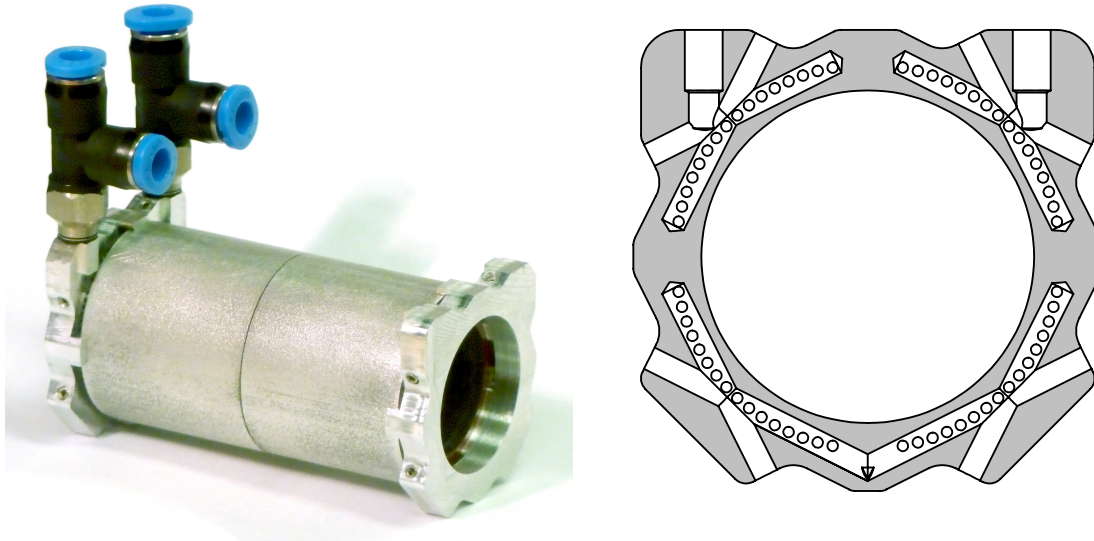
Cooling manifolds are shown installed on the ends of the outer magnet array (left), along with a cross-sectional view of the manifold (right). At one end of the motor, water is brought in and out via 4 mm push-to-connect tee fittings, which also serve as sites for thermocouple probes. The cross-drilled fluid passages are sealed with M2 set screws, several of which are visible on the front of the motor. Two passages suffice to connect all 16 tubes in a bank, and the holes are extended to connect banks of tubes.
